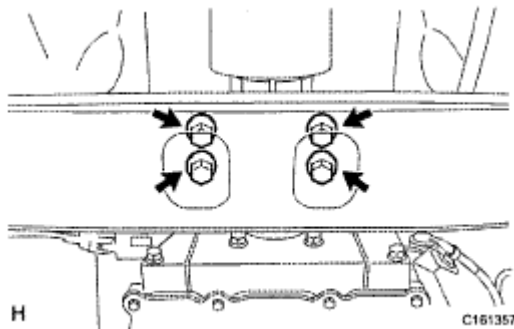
Identifying Nuts, Washers, Bolts And Frame Crossmember
